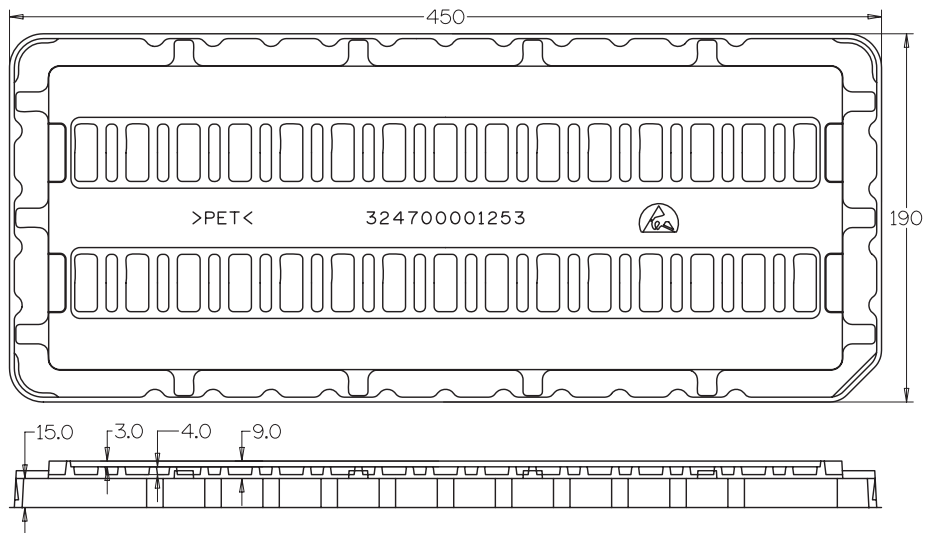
Tray cover dimensions for L2T0-xxxx012M00000.
